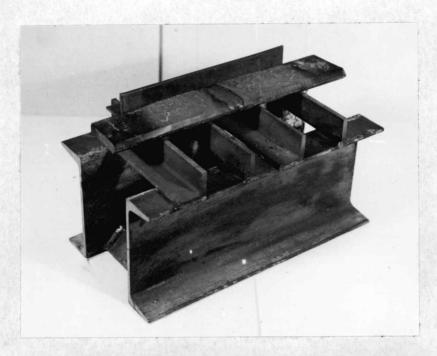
Positioning Fixture for Welding "Y" Blocks.
